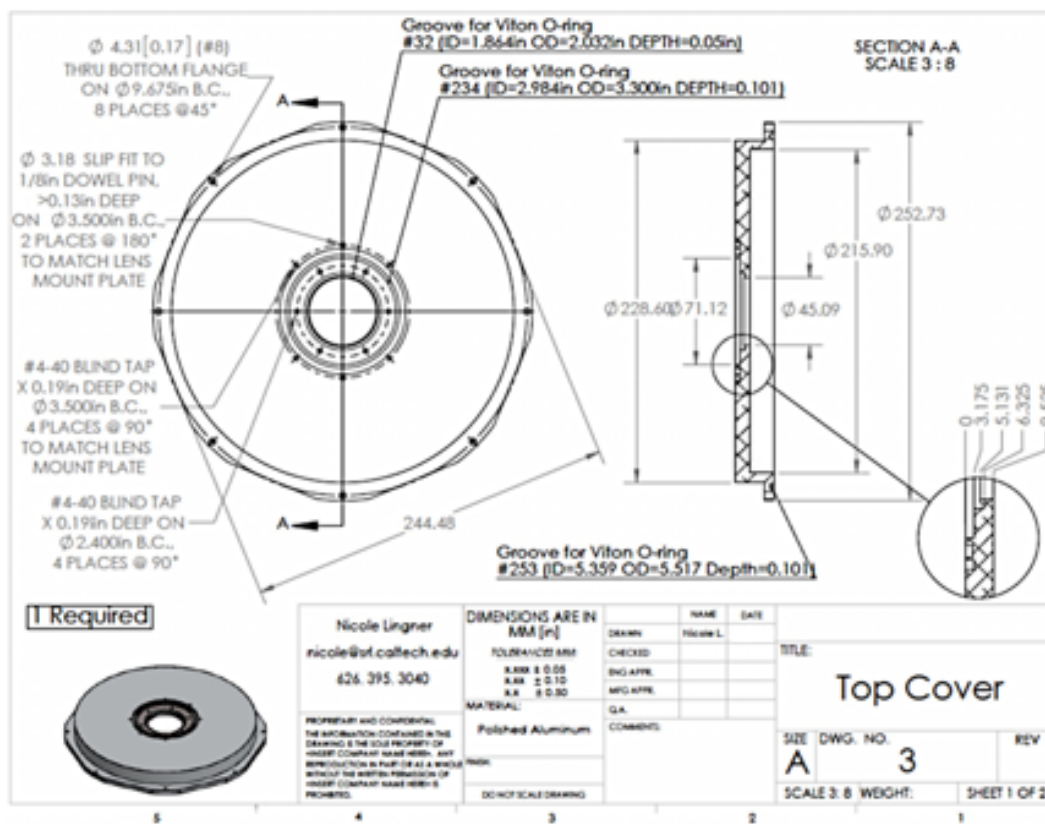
SolidWorks drawing of the vacuum chamber's front cover.
